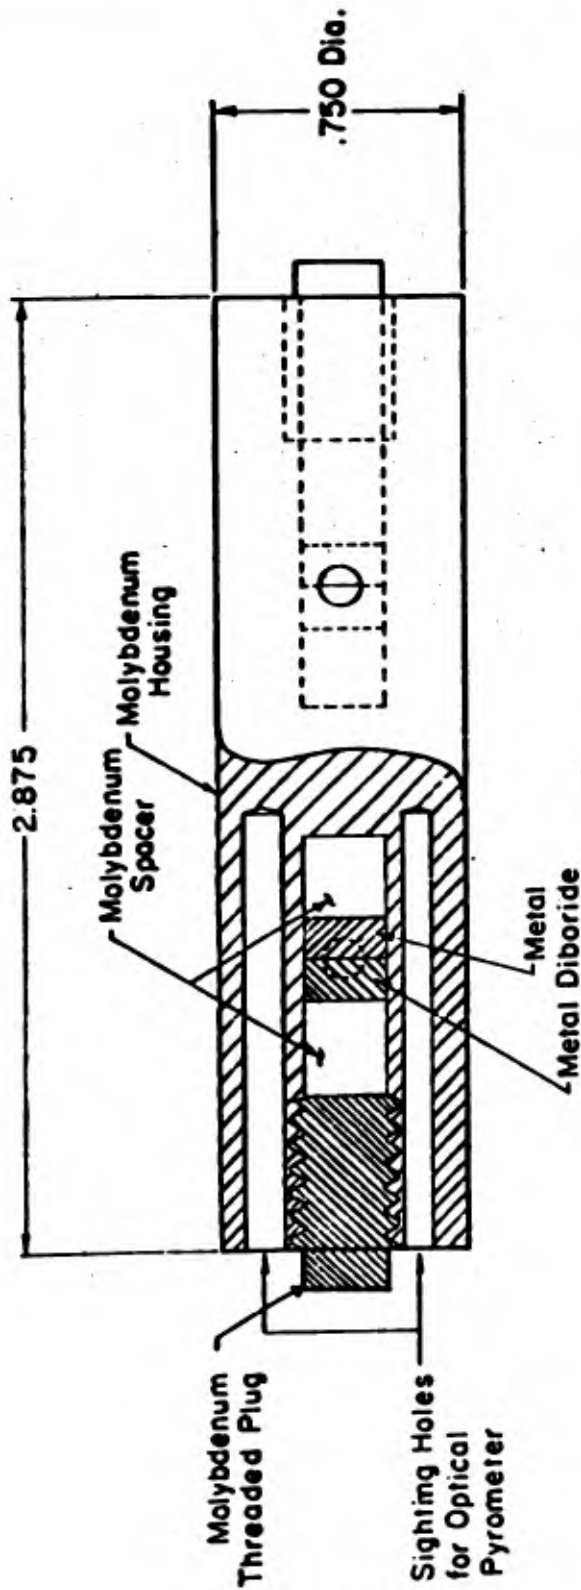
Molybdenum Pressure Welding Apparatus for Diffusion Couples.
